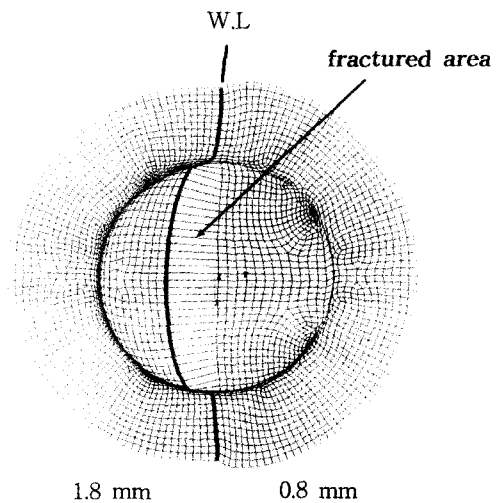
Deformed shape of T/B material for cylindrical cup drawing simulation with BHF=29.4KN
